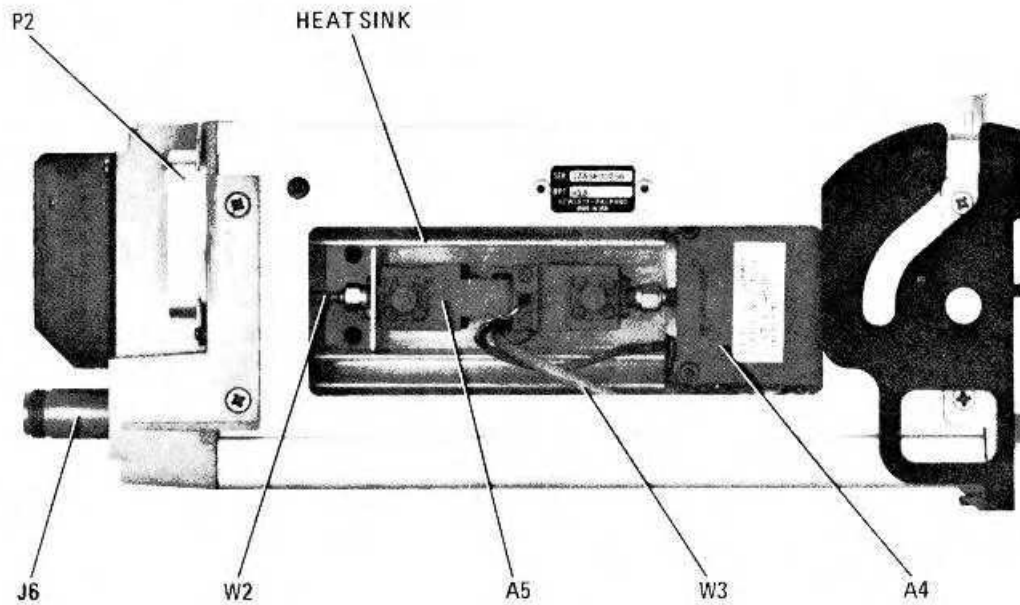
Location of Major Assemblies, Left Side View (Option 004)
